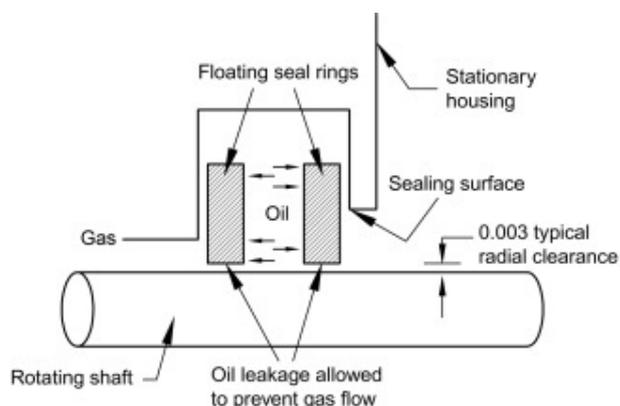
Cutaway illustrating a liquid film seal incorporating carbon seal rings.
